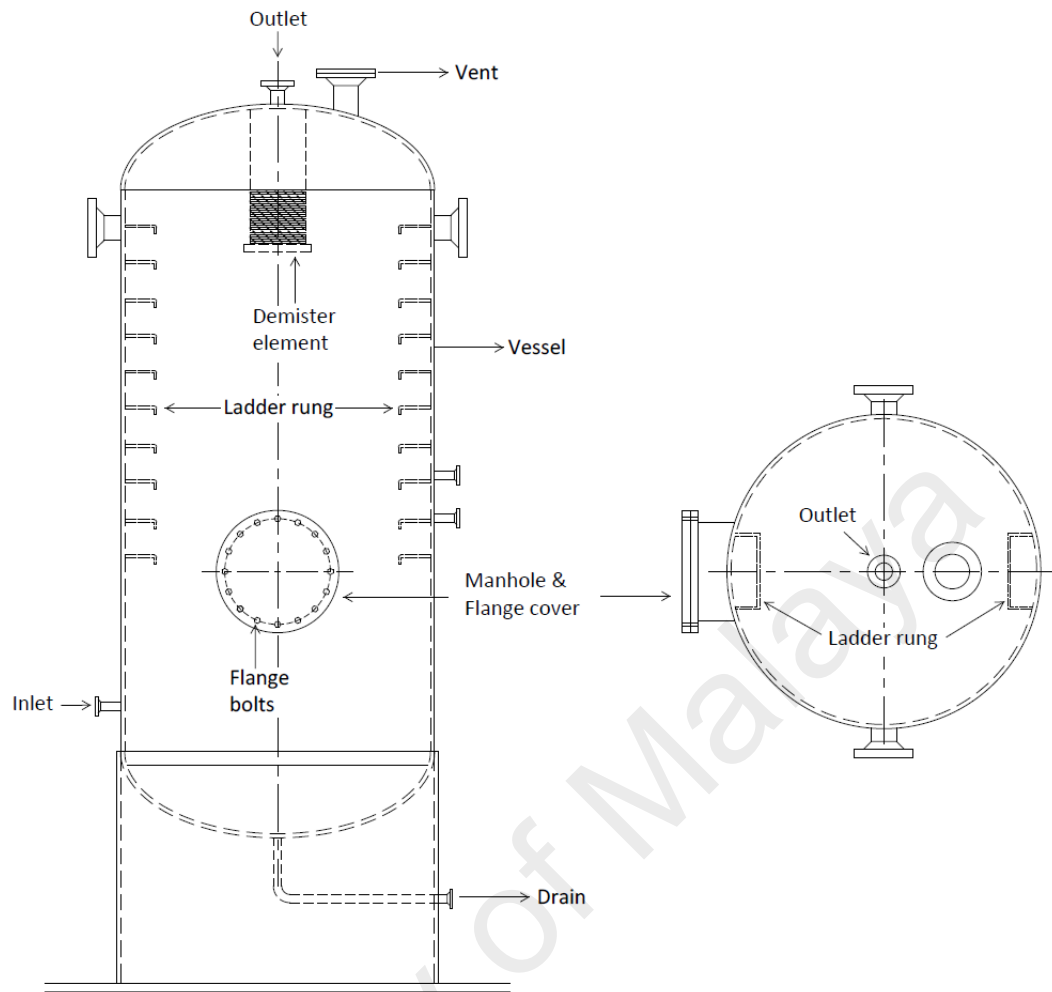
Typical 2D sketch of an empty container type vessel: side view (left) and plan view (right)
